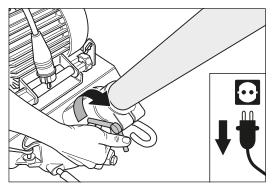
After inserting the guide tube, carefully tighten the wing nut at the machine housing.
